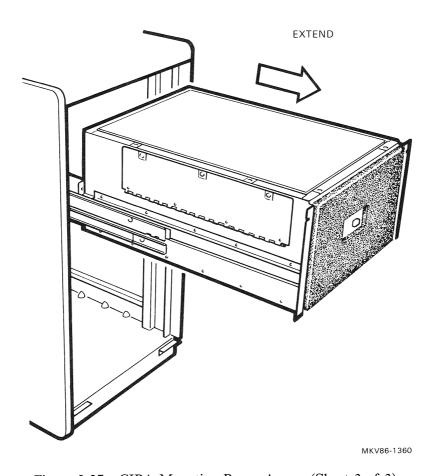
CIPA Mounting Box - Access (Sheet 3 of 3)
